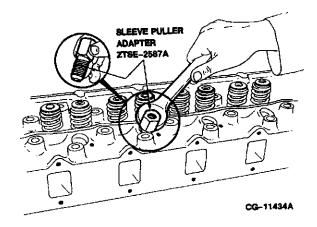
Install Nozzle Sleeve Puller Adapter into Sleeve
